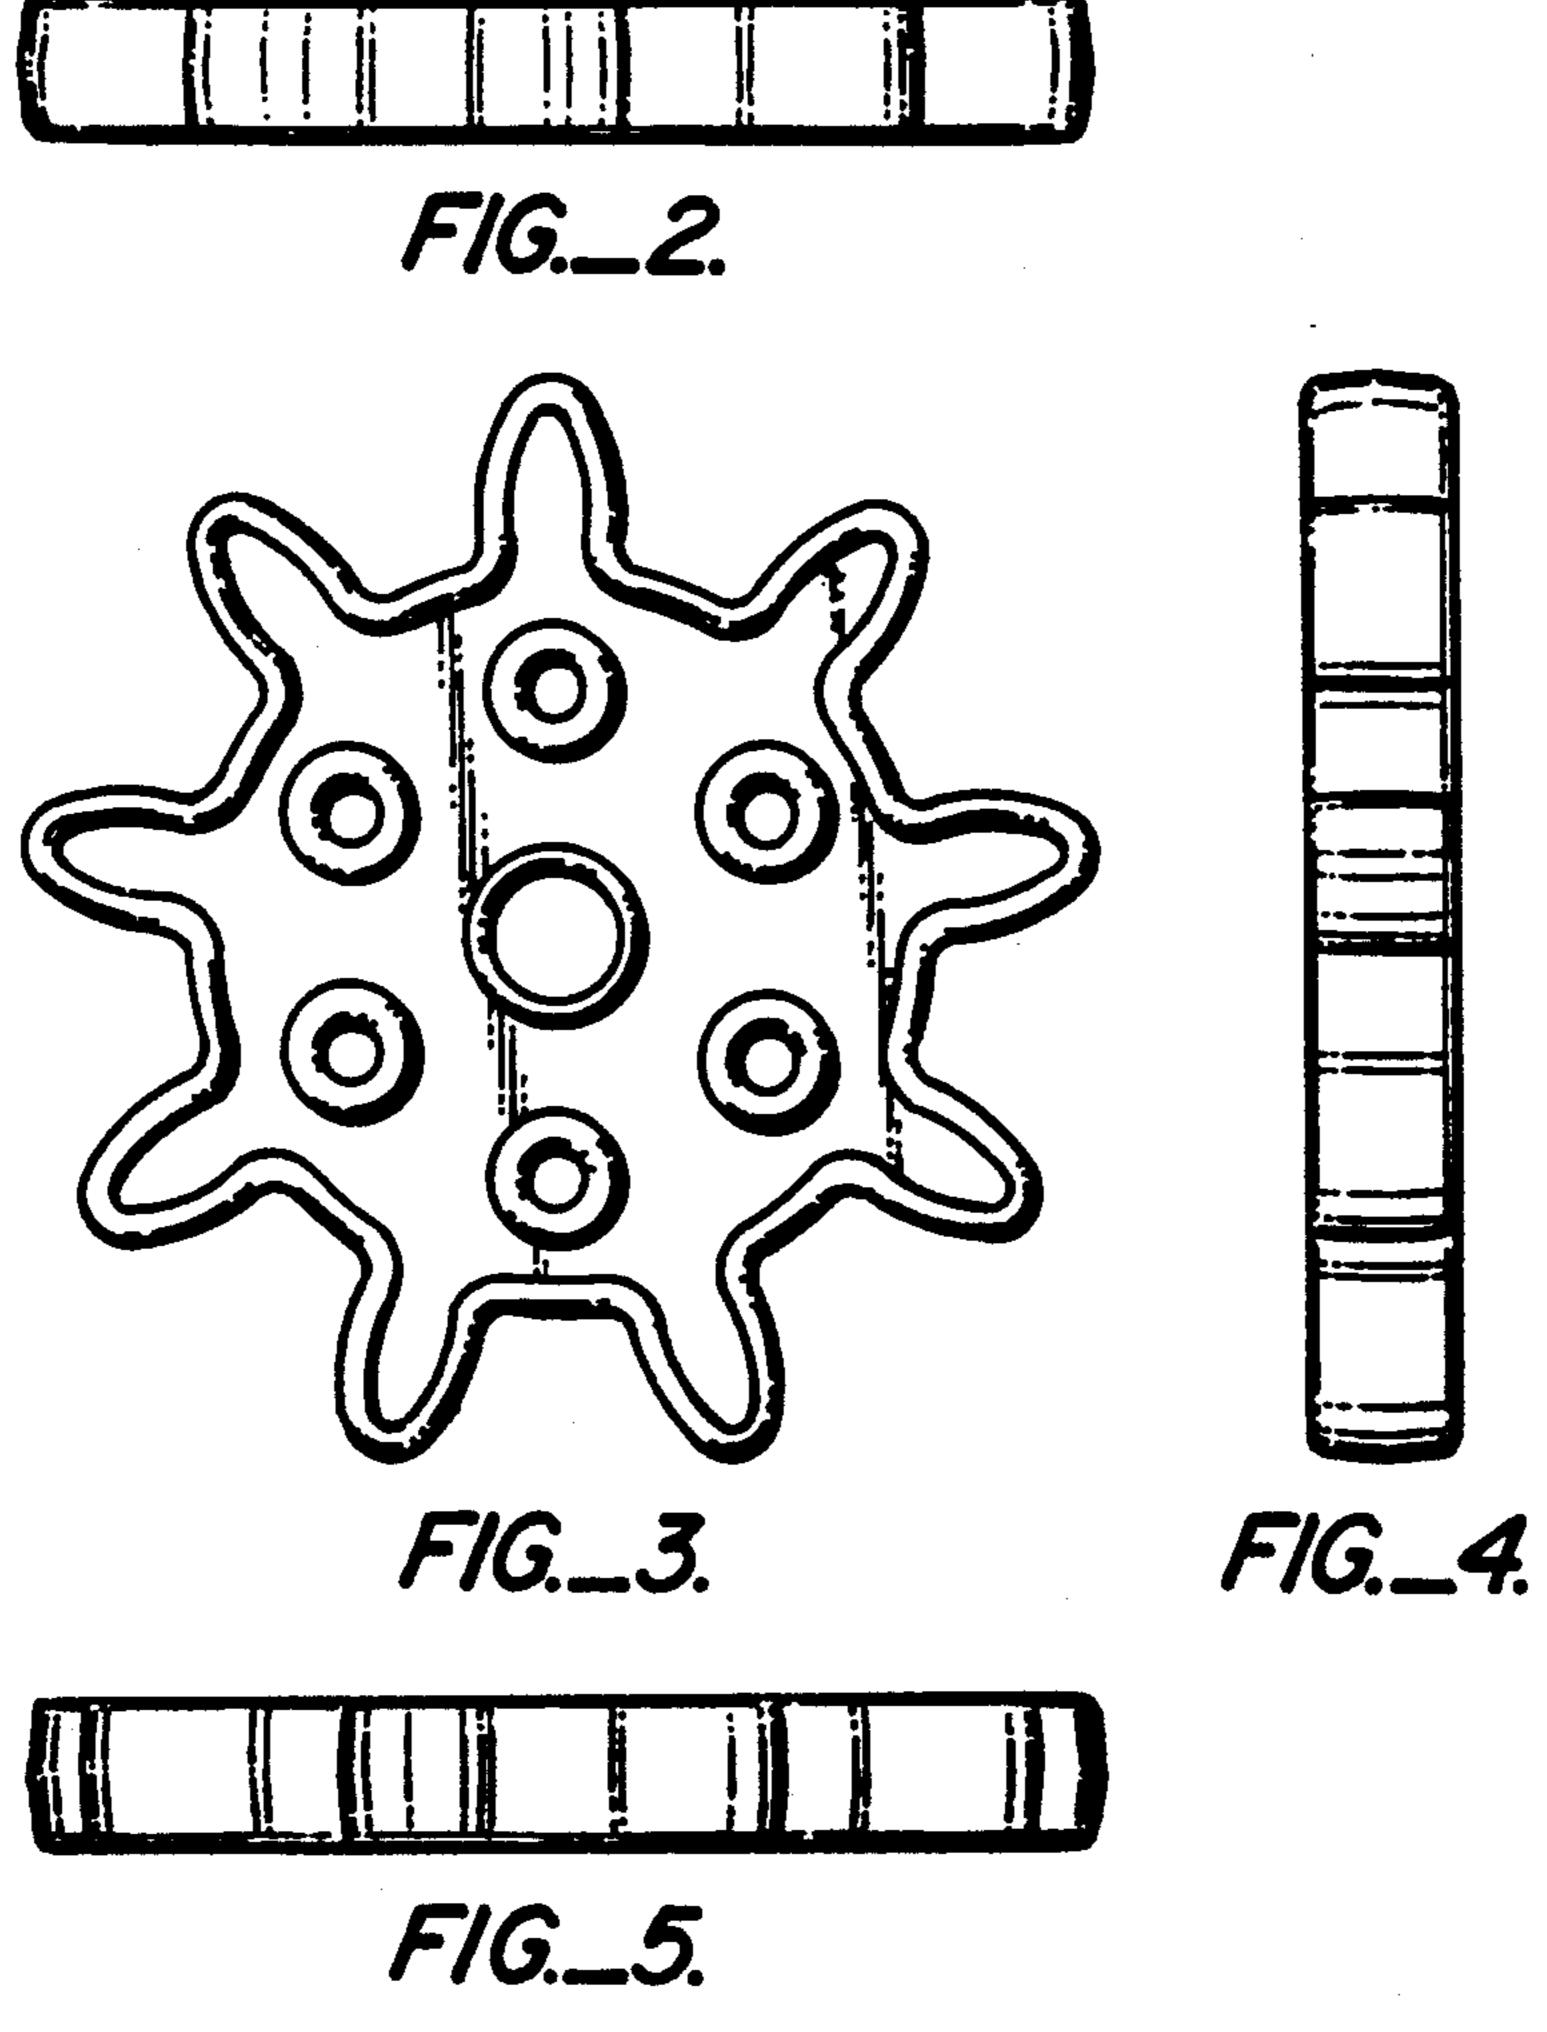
is a front elevational view thereof, the rear elevational view being identical;
